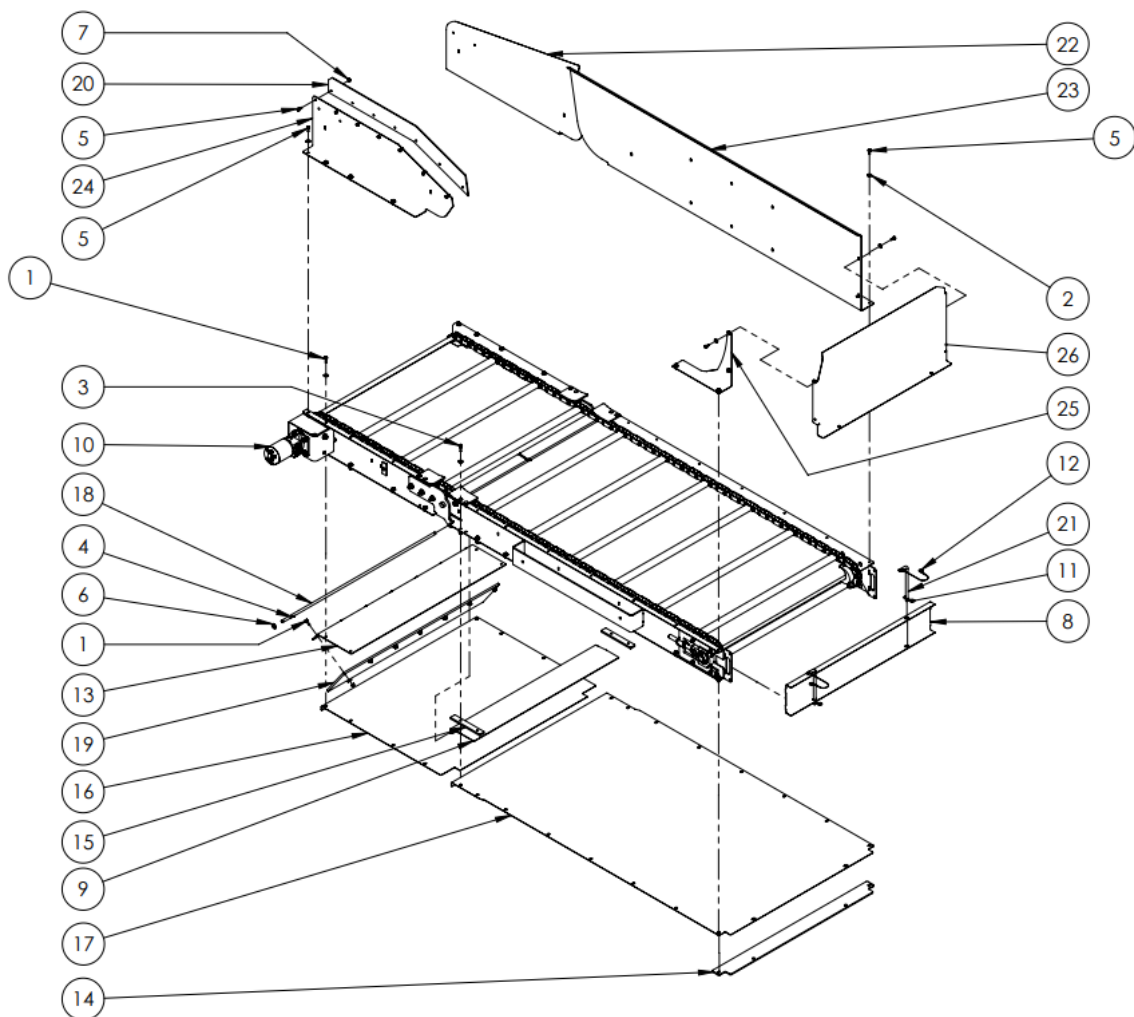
Left Hand Hydraulic folding Conveyor Assembly
